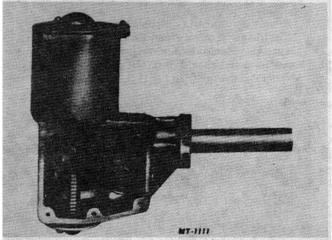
Shift Unit In "Lock-In" Position TWO SPEED AXLES
